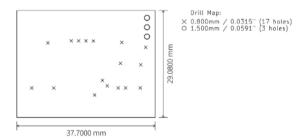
Fabrication drawing (drill drawing view) of the Heater Slave module.
